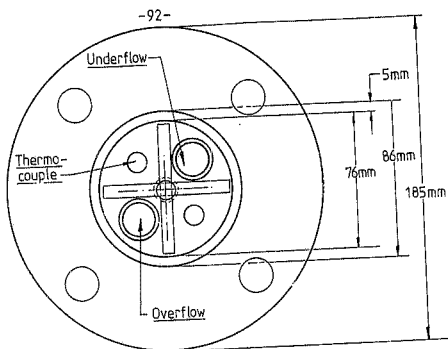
TOP VIEW OF DISTRIBUTOR PLATE
